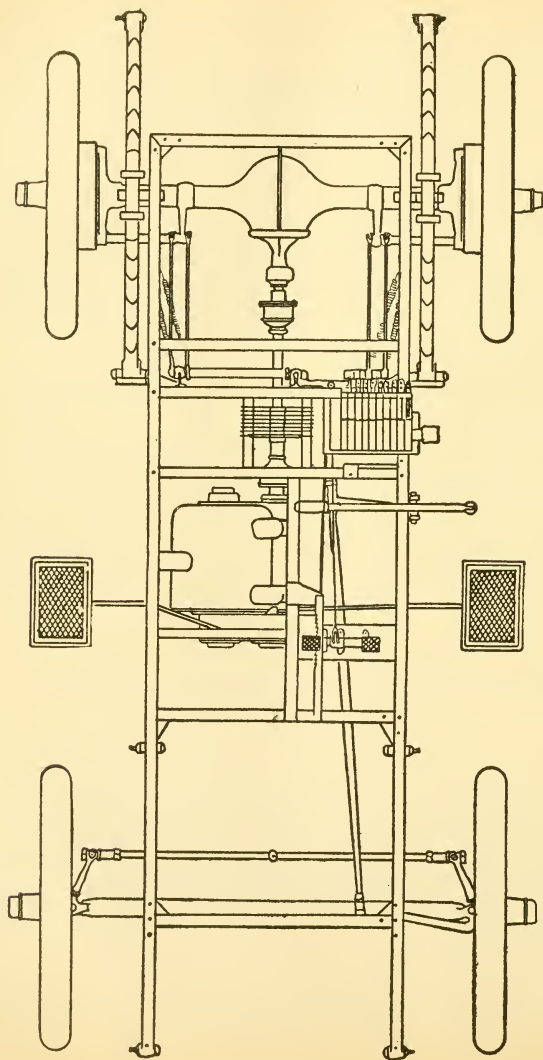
Chassis of Baker electric, showing shaft drive. The first speed reduction is by a short Reynolds silent chain in dust proof casing; power is transmitted to the wheels through the usual bevel gear at the rear axle.
